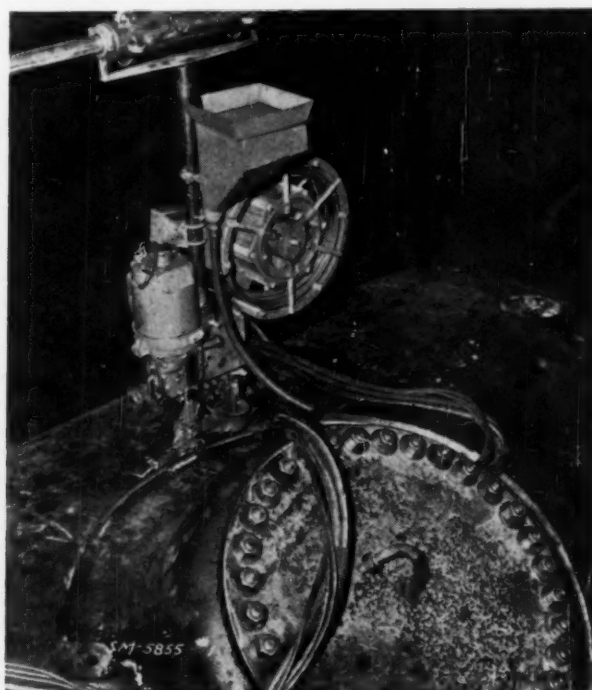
WELDING DOMES TO LOCOMOTIVE BOILERS
